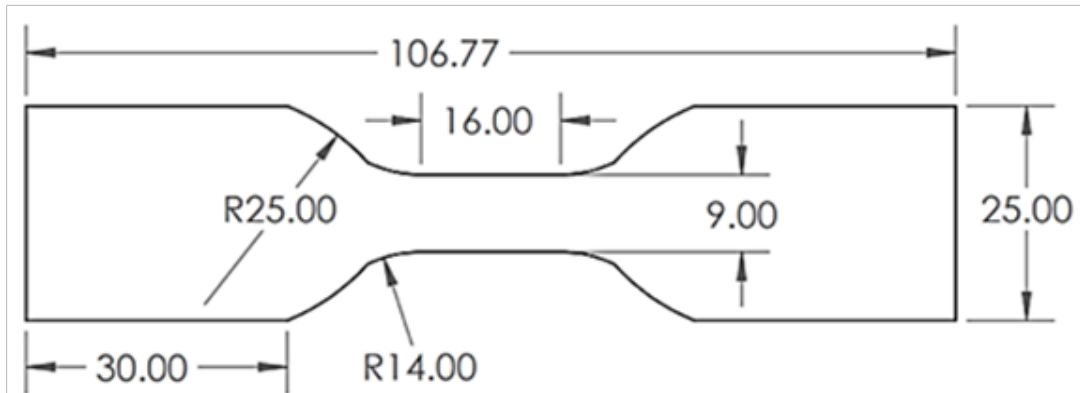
Manufactured specimen die cutter and associated profile geometry
